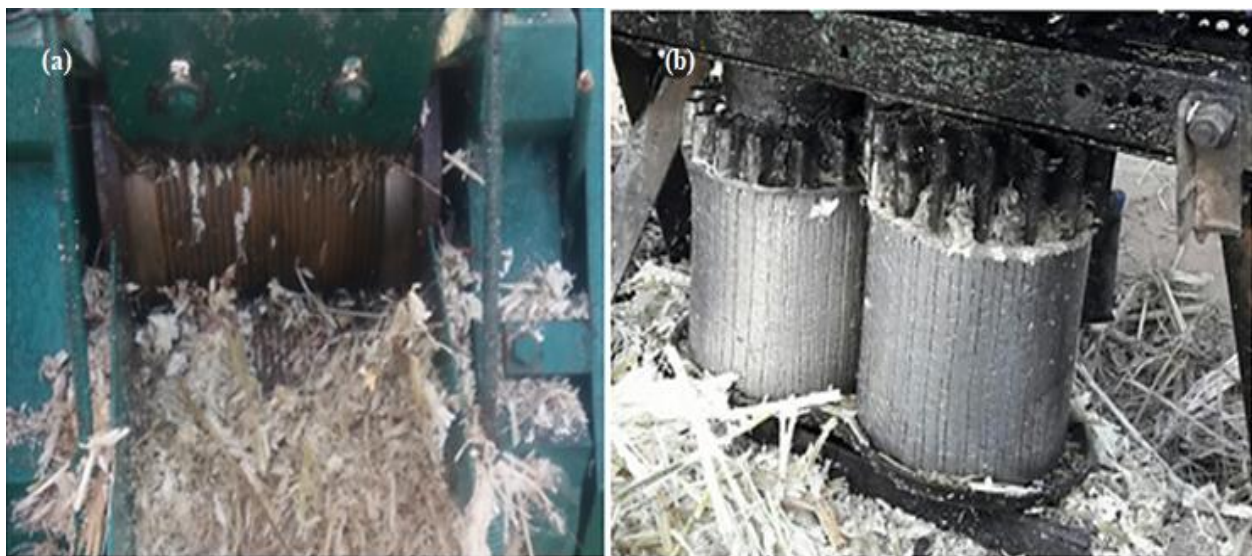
(a) Modified sugarcane crushing assembly (b) Conventional sugarcane crushing assembly
